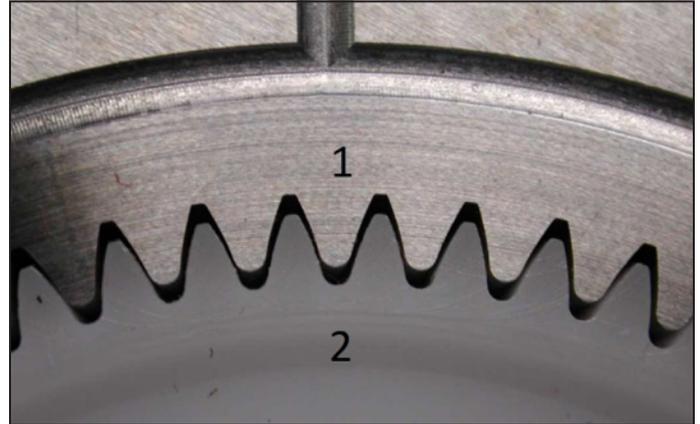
Plastic gear injection molding; 1 – tooling cavity, 2 – gear.
